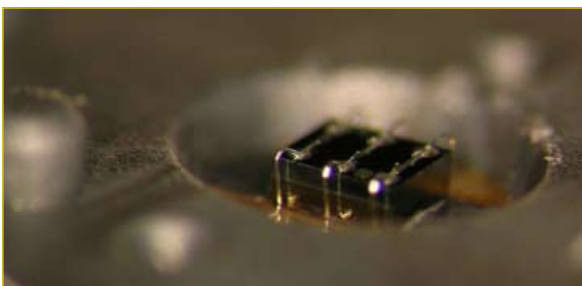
Wire bonded chip in the cavity of a molded element, with alignment features (pin on the left) for further assembly processes
